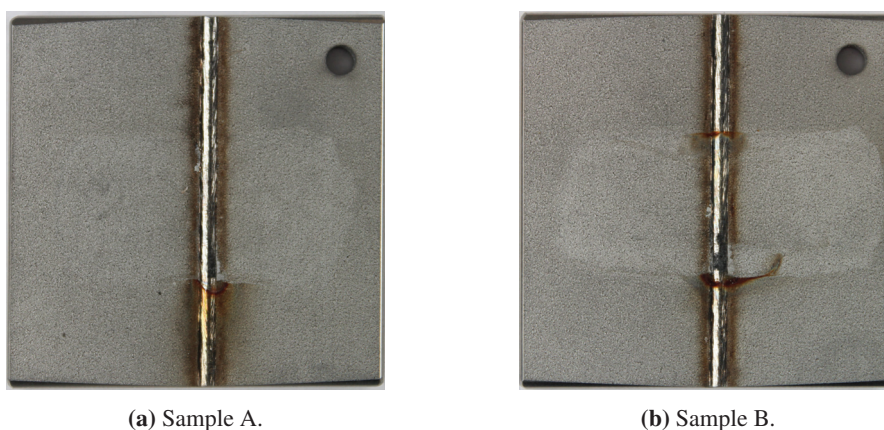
Corrosion attacks on the laser-welded, not pickled, coated samples exposed at OCP.
